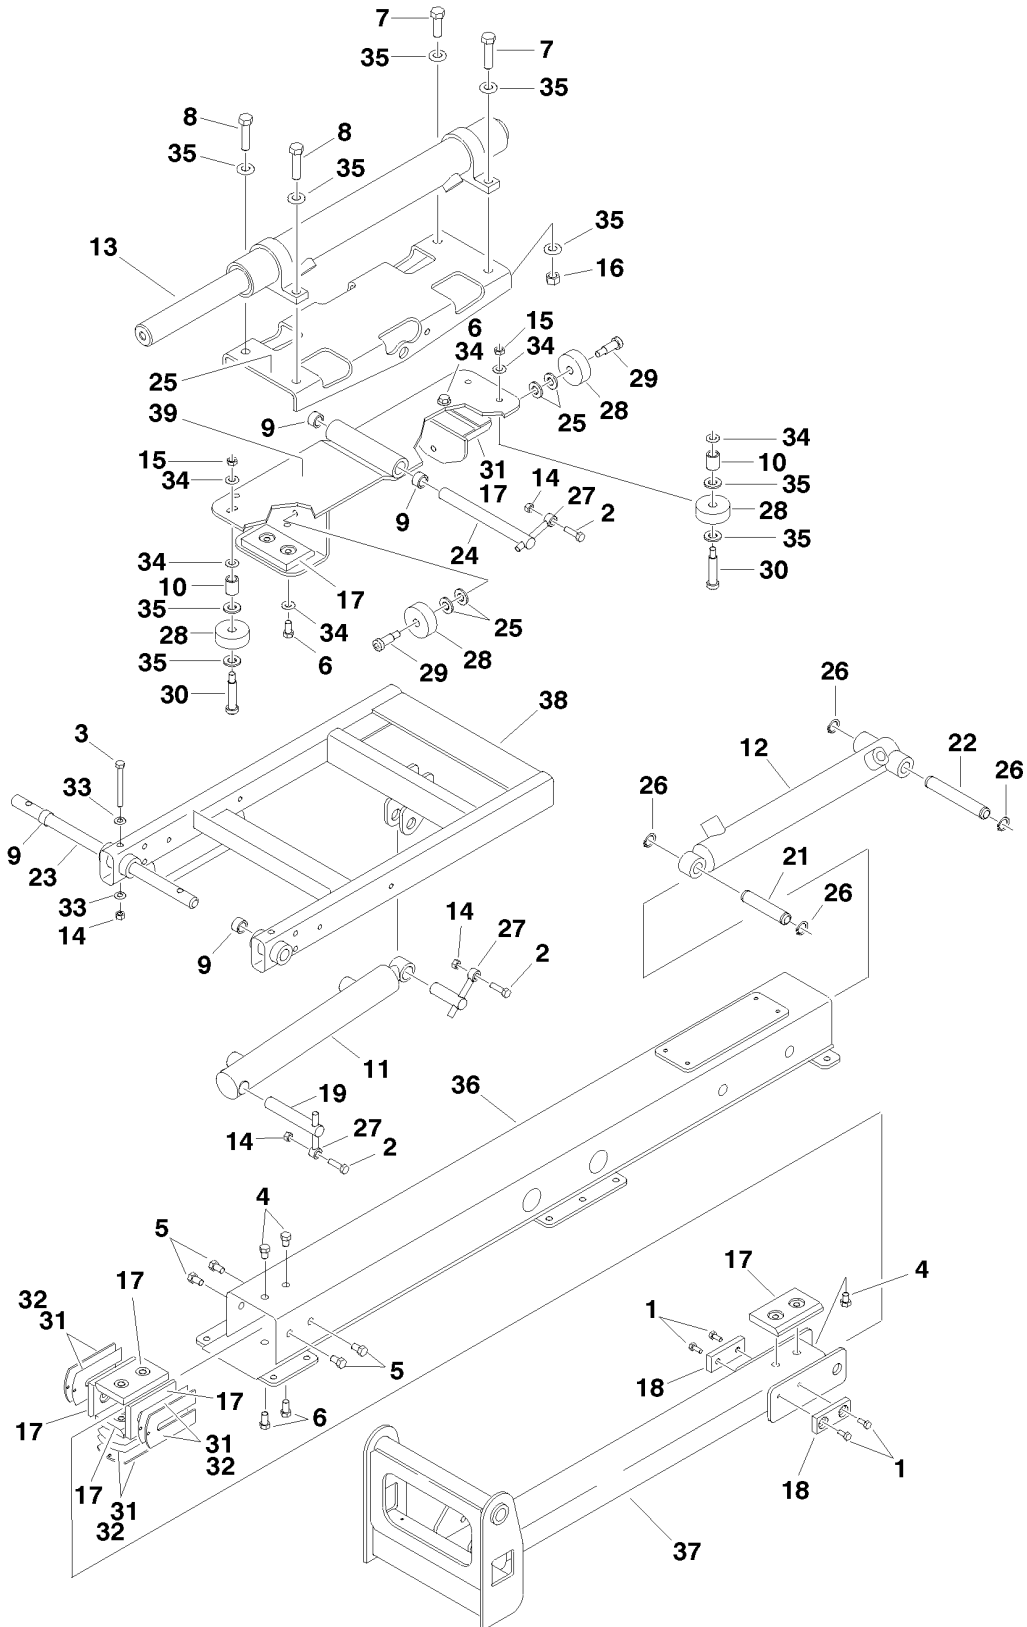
Easi-Cladder™ Plus Assembly Parts Drawing
